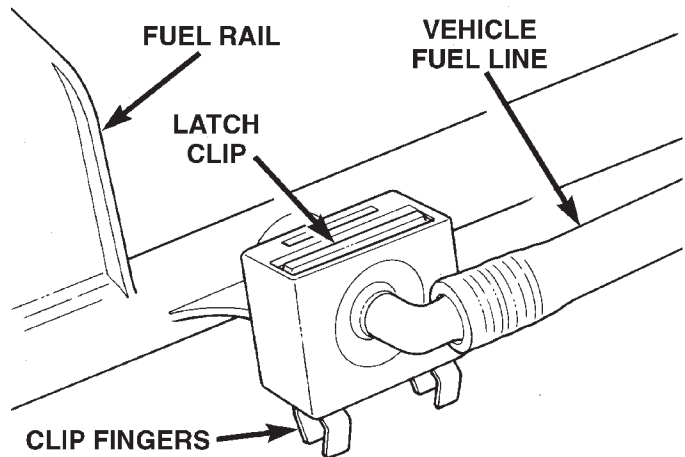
Latch Clip—5.2L/5.9L Engines Without Fuel Test Port
